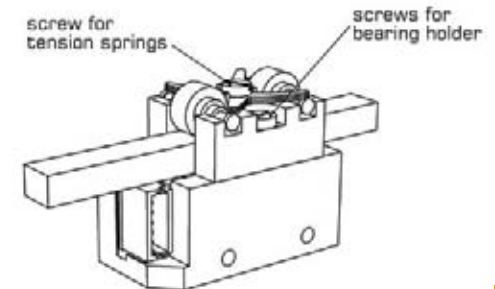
Schematic view of a Piezo LEGS linear motor showing the screws for the bearing holder and springs.
